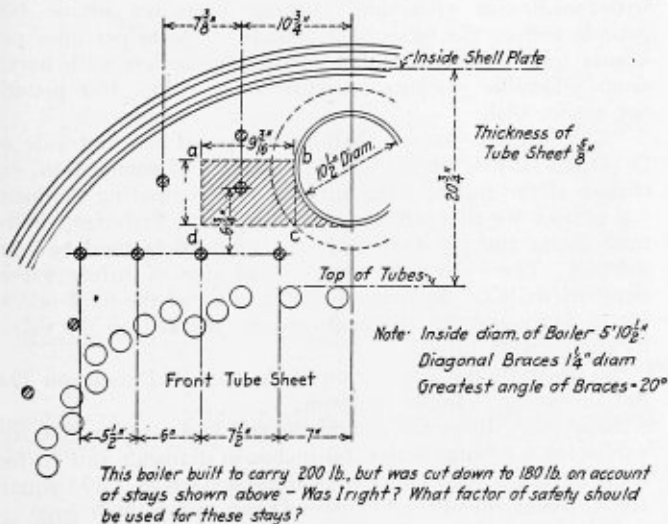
Sketch Outlining Conditions on Stayed Head
